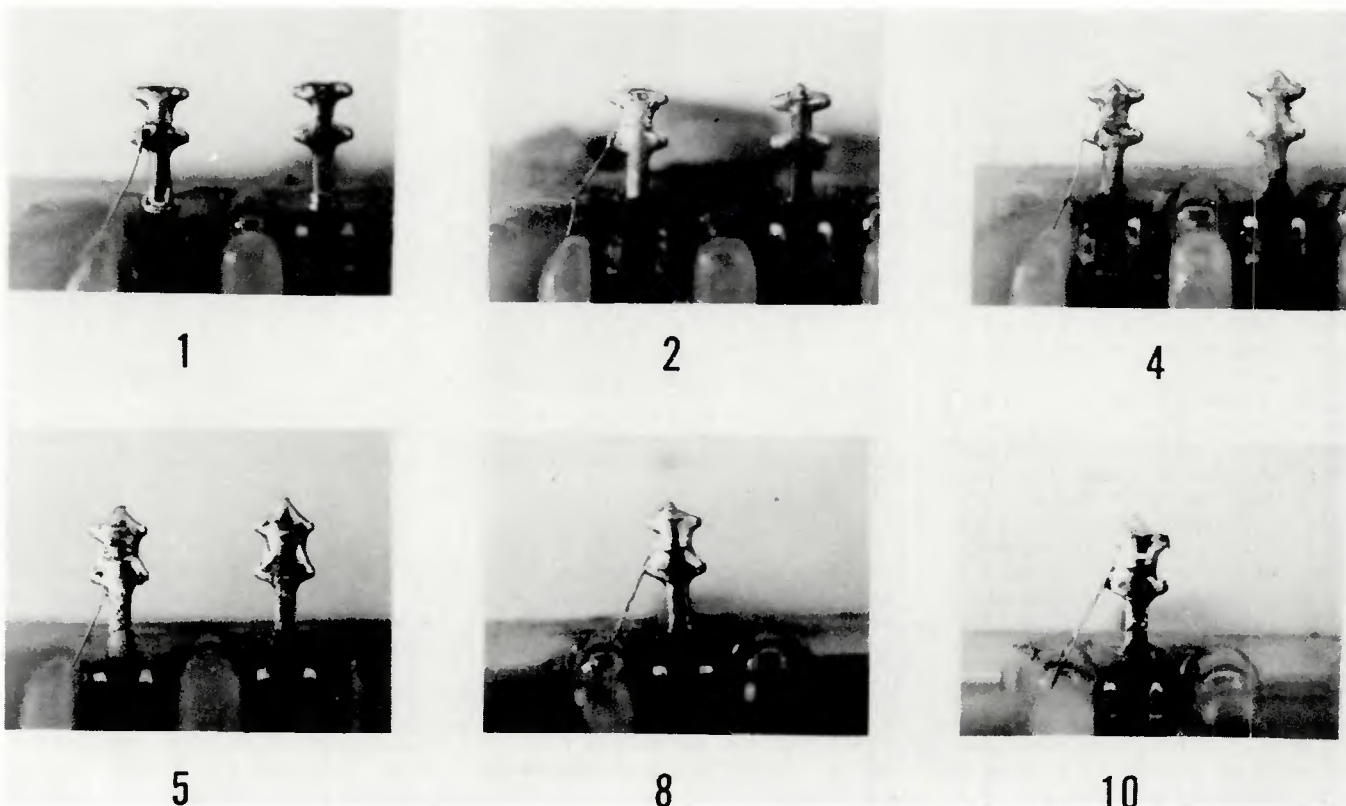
Coil wire-terminal soldered joints with solders from Table 1. X6, reduced 23%
